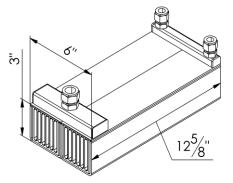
DIMENSIONED DRAWING OF THE SECONDARY HEAT EXCHANGE ASSEMBLY. INTERNAL SHELL BAFFLES PREVENT AMMONIA FROM SHORT-CIRCUIT FLOW AND IMPROVE HEAT TRANSFER.
